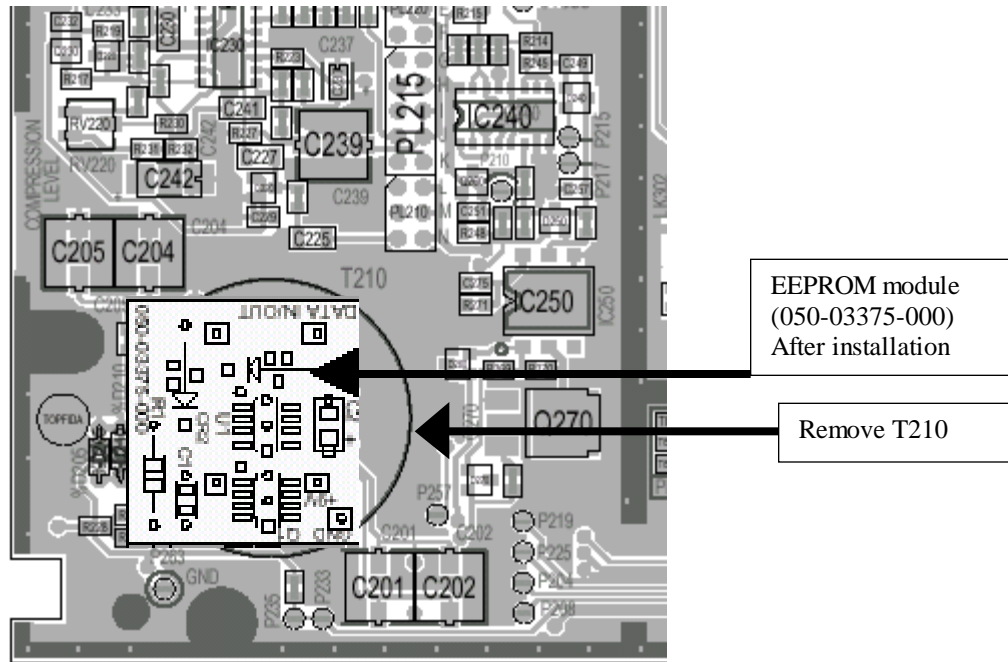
T857 Exciter PCB (rev 220-01398-(03A & 04)), Top Side (EEPROM module) 1/2
